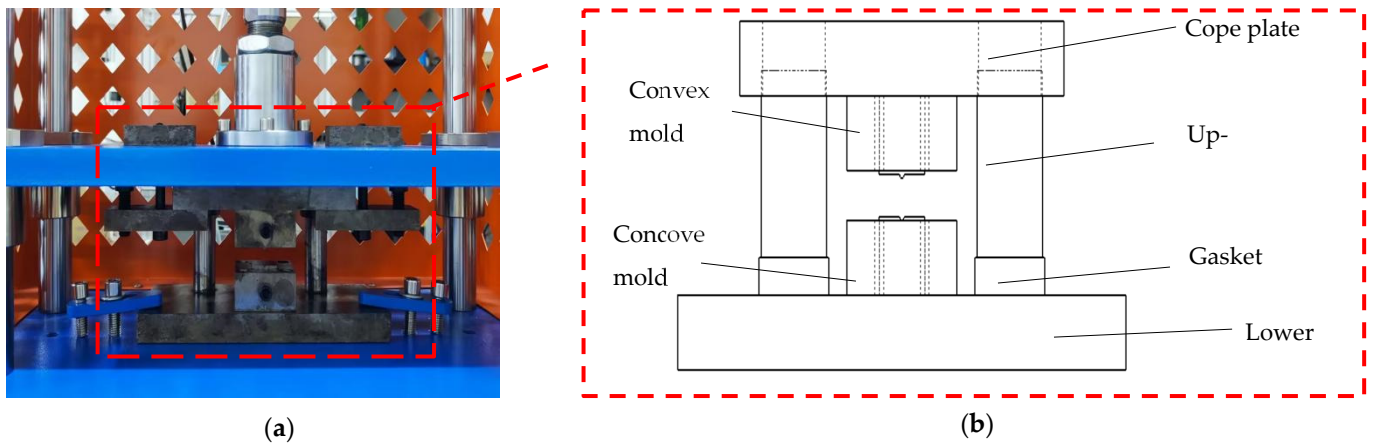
Micro-bulging mold. (a) Physical drawing of the mold. (b) Drawing of the mold structure.
